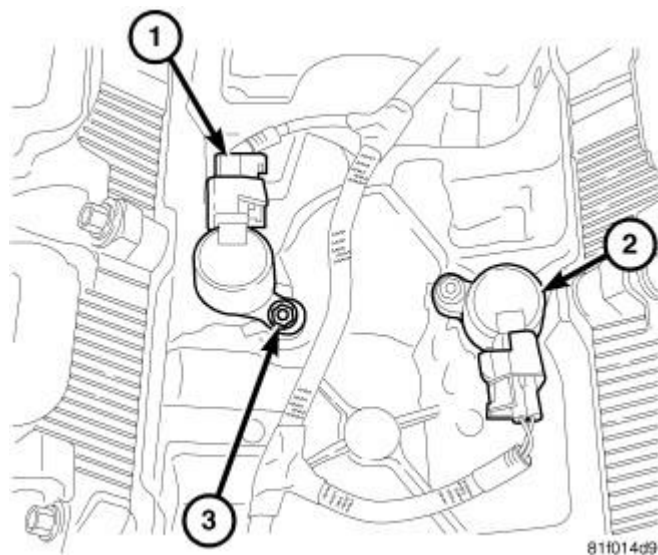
MDS Solenoids, Electrical Connectors & Retaining Bolts
